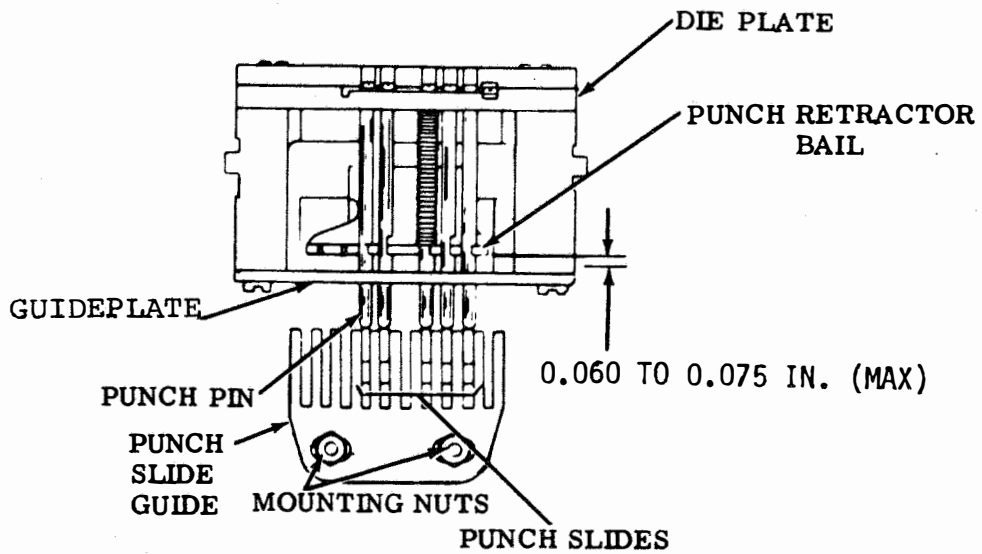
Punch Pin Penetration and Punch Slide Guide (For Chadless Tape), Left Side View
